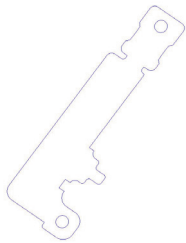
Parts of the blank flat pattern¹⁾²⁾
